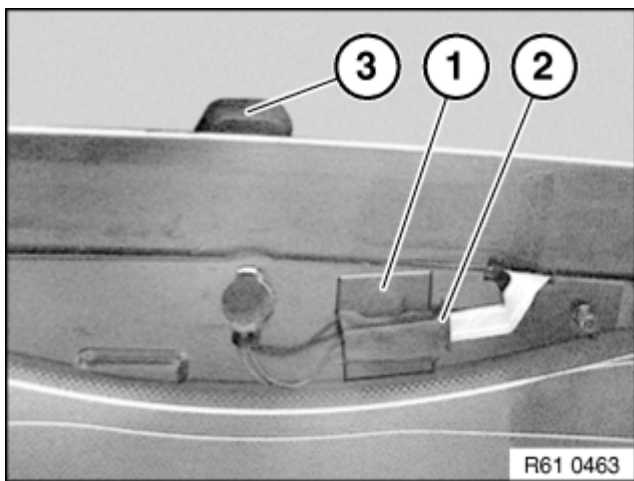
Locating Plug Connection, Secured Rear Window Button, And Adhesive Tape
